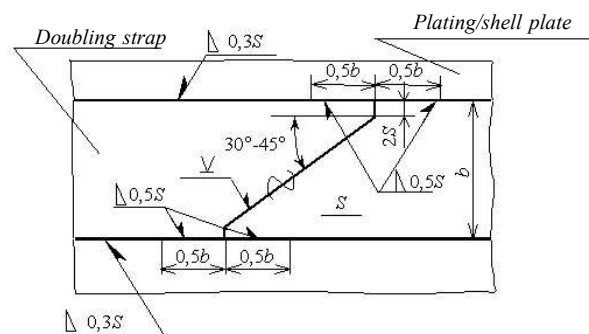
Adjustment of doubling strap butts
